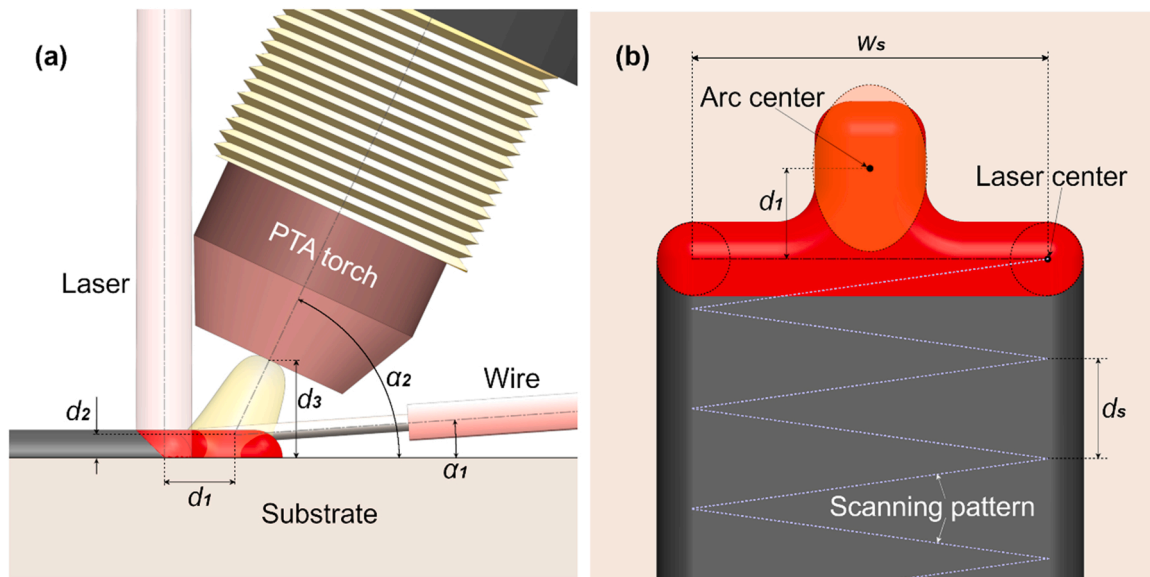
Position of the torch, laser and wire: (a) side view and (b) top view.
